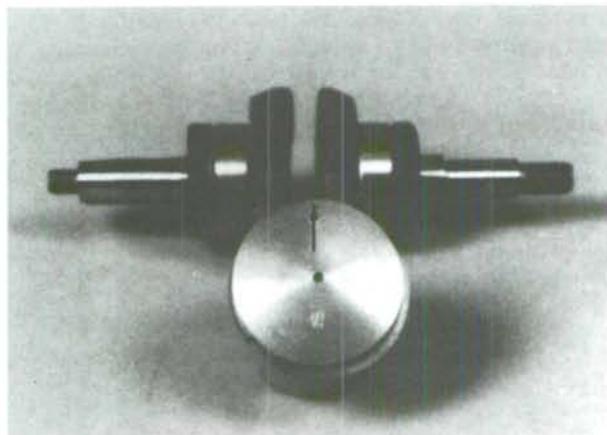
Install piston onto connecting rod with arrow pointing toward exhaust port.
